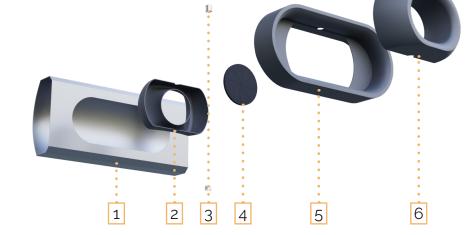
Exploded view of the supply valve with the most important elements labeled. [1] Duct with cutout, [2] Back shell blow-in heads, [3] Low: hollow axis, high: servo rotation axis, [4] Iris, [5] Main housing, [6] Front shell blow-in heads.
